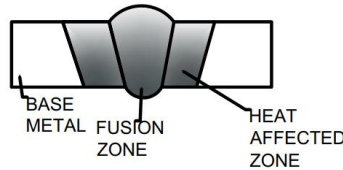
indicating heat affected zone (Mustafa Kemal Kulekct, mechanical properties of friction stir welding.)
